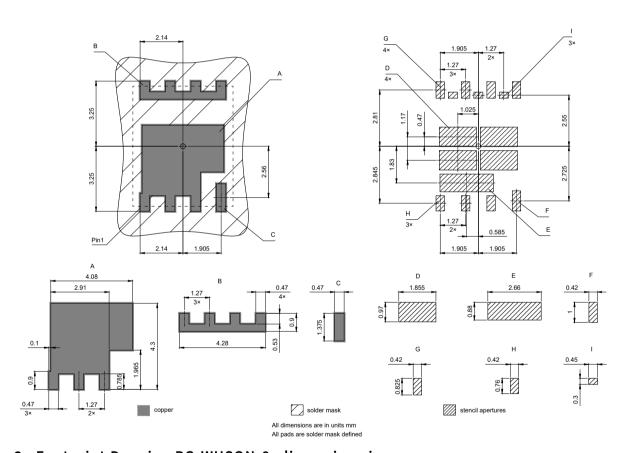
Footprint Drawing PG-WHSON-8, dimensions in mm
